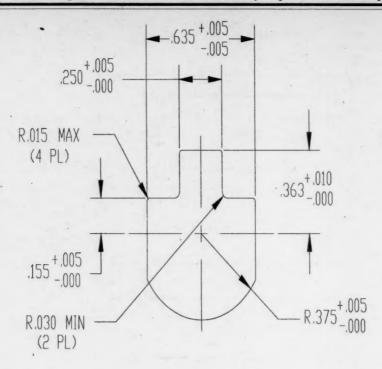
Mounting Hole, PSIN 0910 Customer Lock
